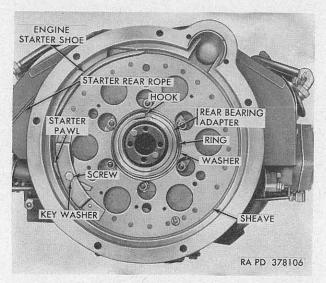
Engine with torsion spiral spring and cover removed showing starter sheave.
